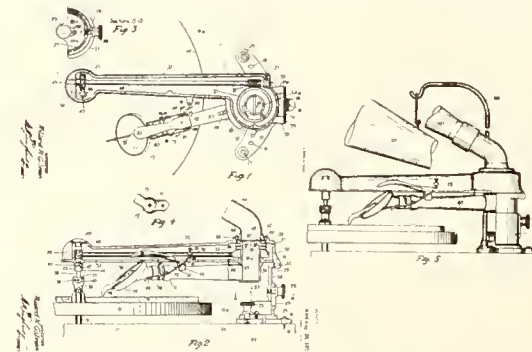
is a top plan view of a talking machine illustrating the elevating means on the turntable; Fig. 2 is a view similar to Fig. 1, showing the turntable removed to more clearly illustrate the details of construction; Fig. 3 is a
